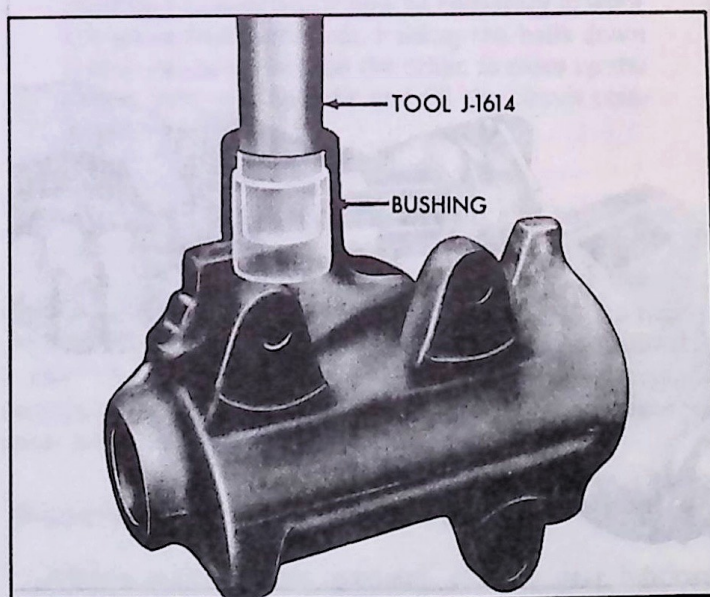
Removing Pitman Shaft Bushing Using Tool J-1614—Typical
